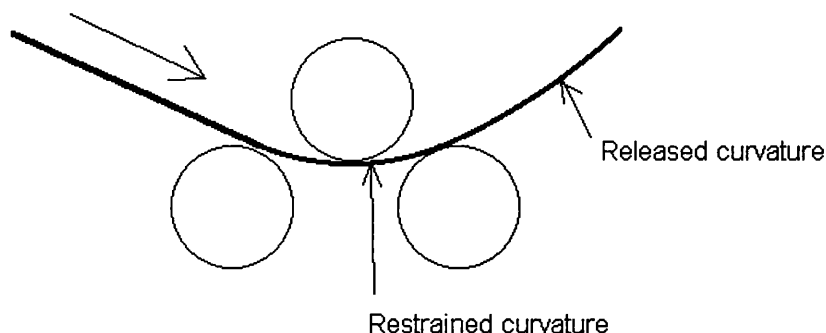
, Three wheel mechanism, cold forming type 1.
